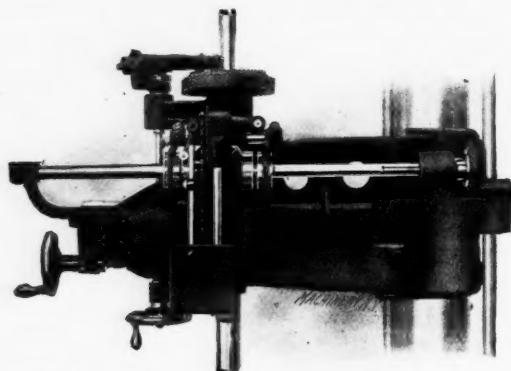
Rear of Head of Radial Drill showing Feed and Reversing Mechanism.
